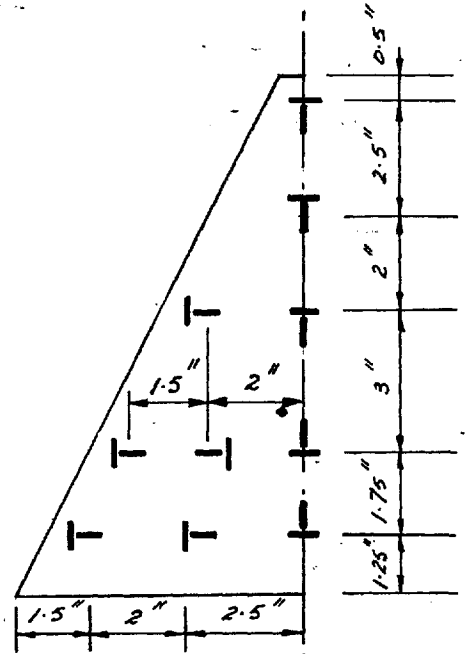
Set-up for welding of base plates to pyramids.
